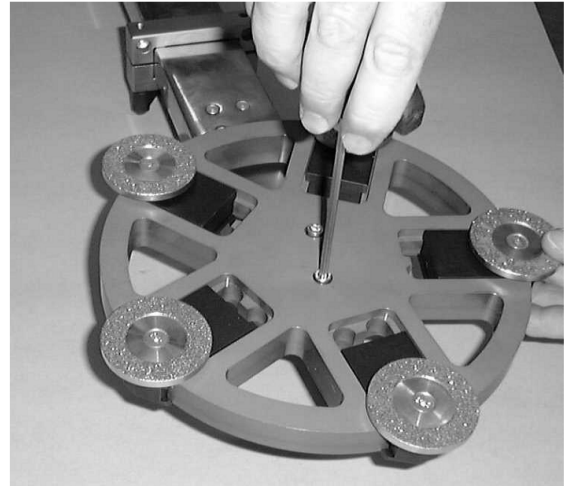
ADAPTATION OF PLANET WHEEL TO BALL JOINT COUPLING
